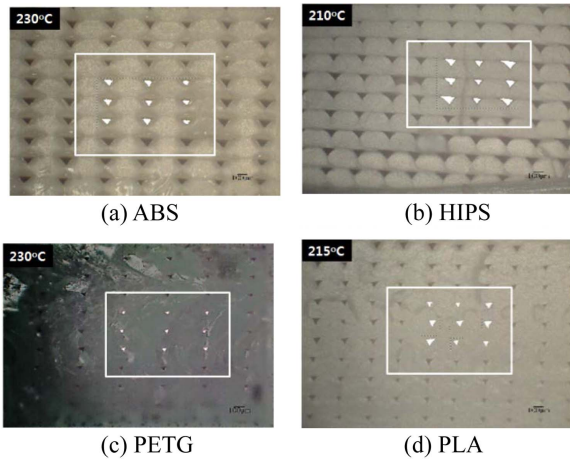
Photos of fractured surfaces of 3D printing manufactured specimens.
